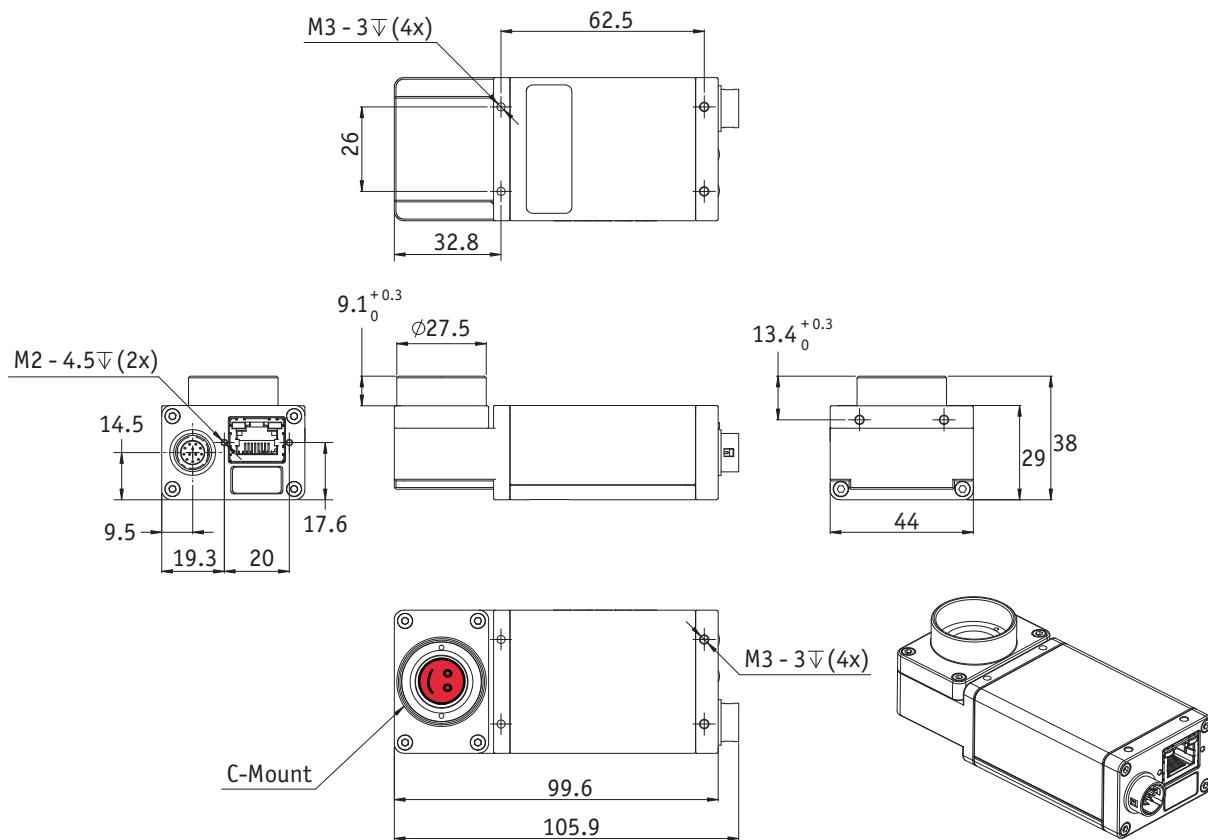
Camera dimensions W90 cameras: Manta G-223 / 235 / 419
